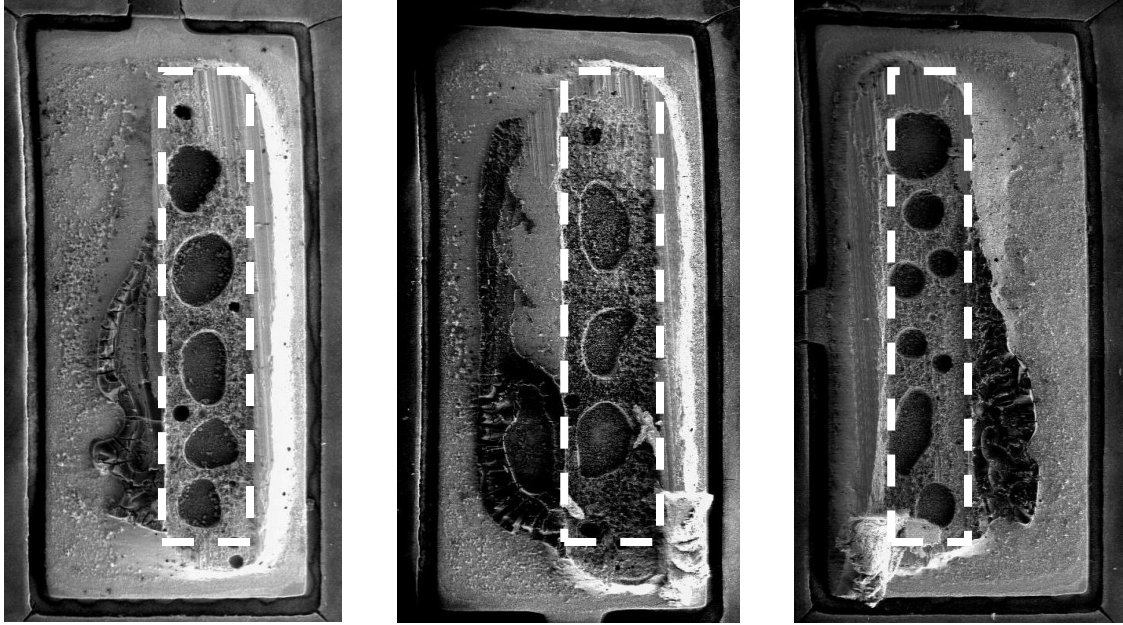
SnAg+Cu Nano solder joints aged 500 hours at 200°C, three shear fracture surface examples located in the remaining solder joint on the board level (courtesy CALCE).
